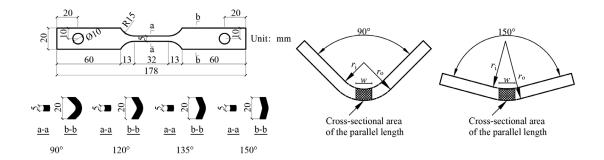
Dimensions and cross-sectional geometries of the corner coupon.
